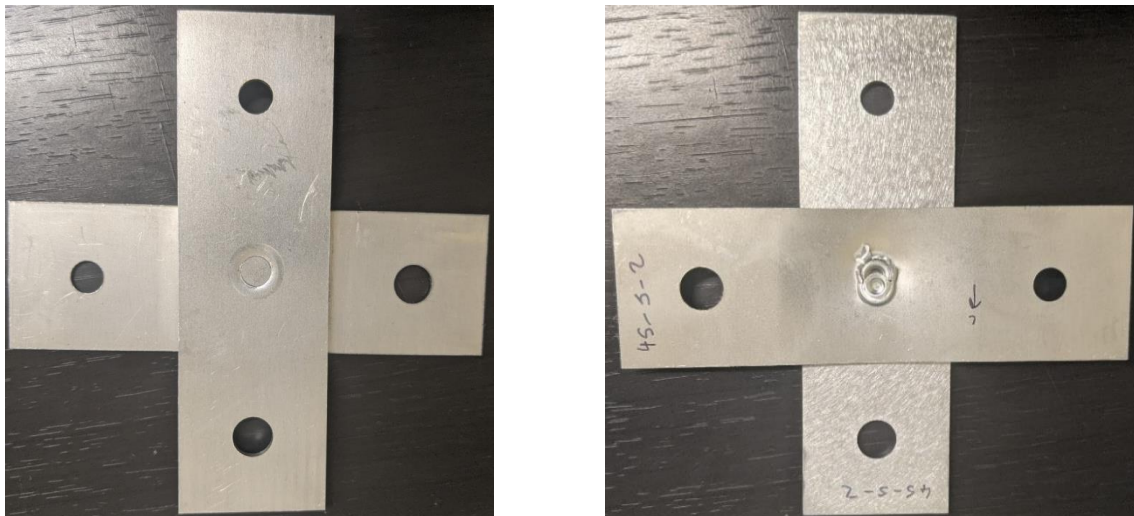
Al 6016 2mm by 1mm SPR cross-tension post quasistatic test 45° test pierced 2mm sheet (left) and clenched 1mm sheet (right)
